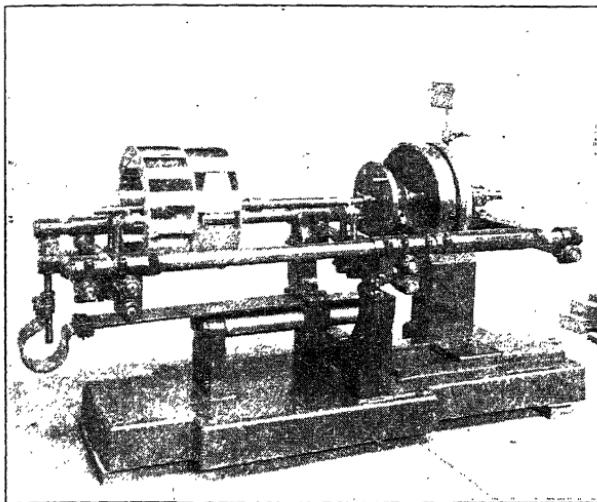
Dynamic Crankshaft Balance Machine with Crankshaft and Flywheel Assembly in Position
